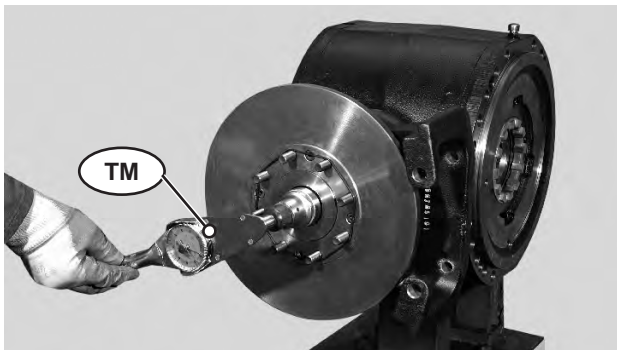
Apply torque meter TM to pinion nut and check that torque will increase by 20 - 40 Ncm as a result of differential bearing preload.
